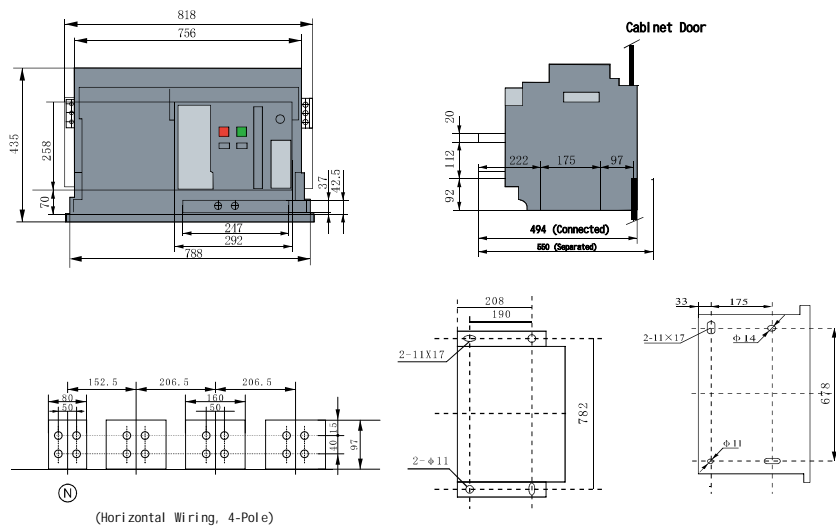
Installation and Outline Dimensions of Drawer-Type Circuit Breaker (XLDW1-4000/4)
